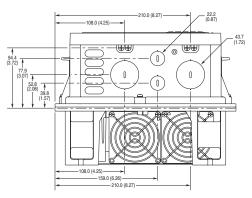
VTAC 9 Frame B...E Flange Mount Bottom View Dimensions
